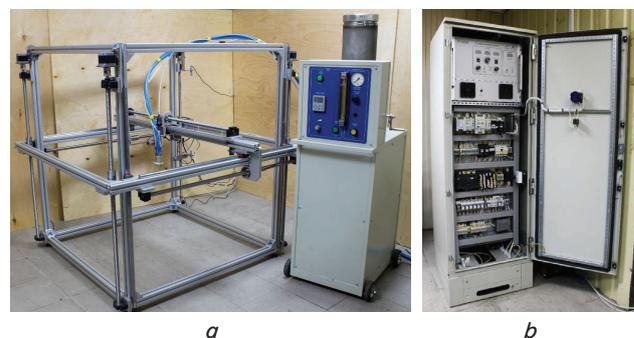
The PLAZER 3D PW installation: *a* – manipulator with a plasmatron and a powder doser-feeder; *b* – view of power supply and control unit with the open front panel
